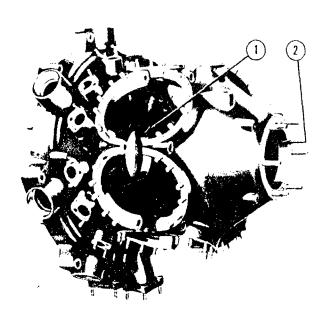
Crankcase Sections Showing Pressed-in Bronze Main Searing Liners, Cage and Threst Bearing Recess
